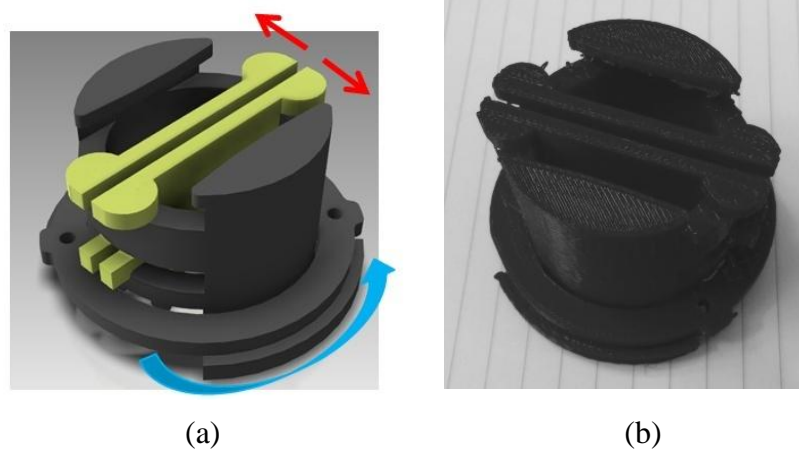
Dual pin hair removing socket with rotating base: (a) The designed model, (b) The printed model
